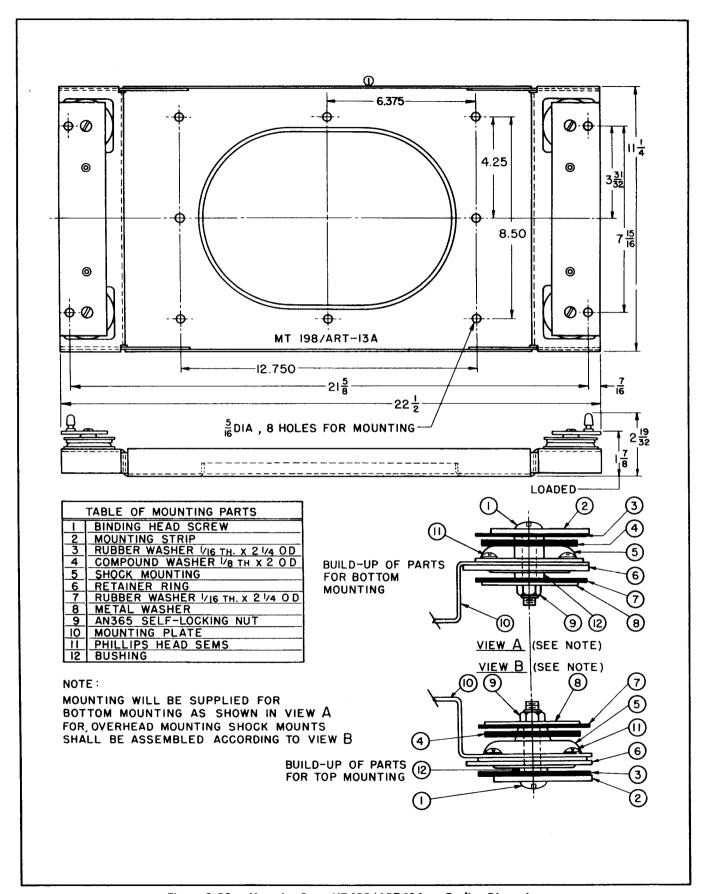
Mounting Base MT-198/ART-13A — Outline Dimensions
